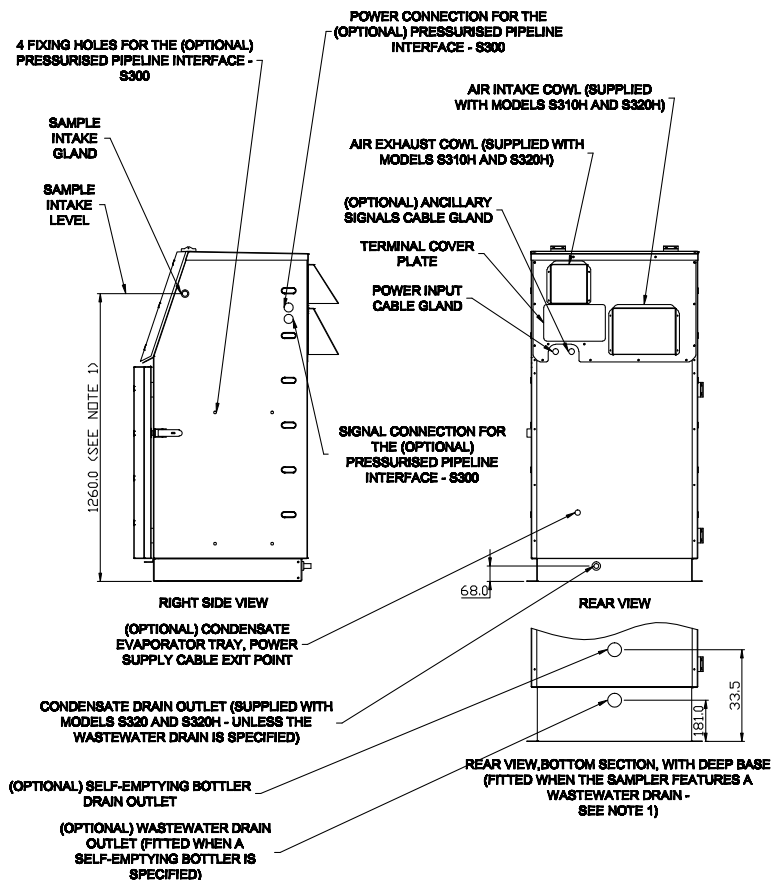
H: Installation Drawing, S300 Series Sampler - Right Side and Rear Views
